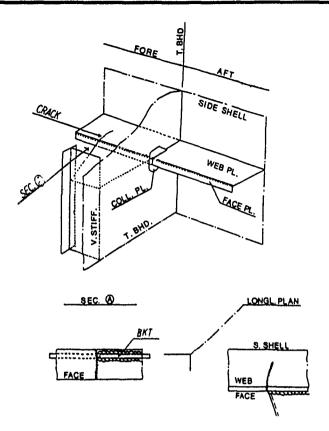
Side Shell Longitudinals Cracks at Transverse Bulkheads
